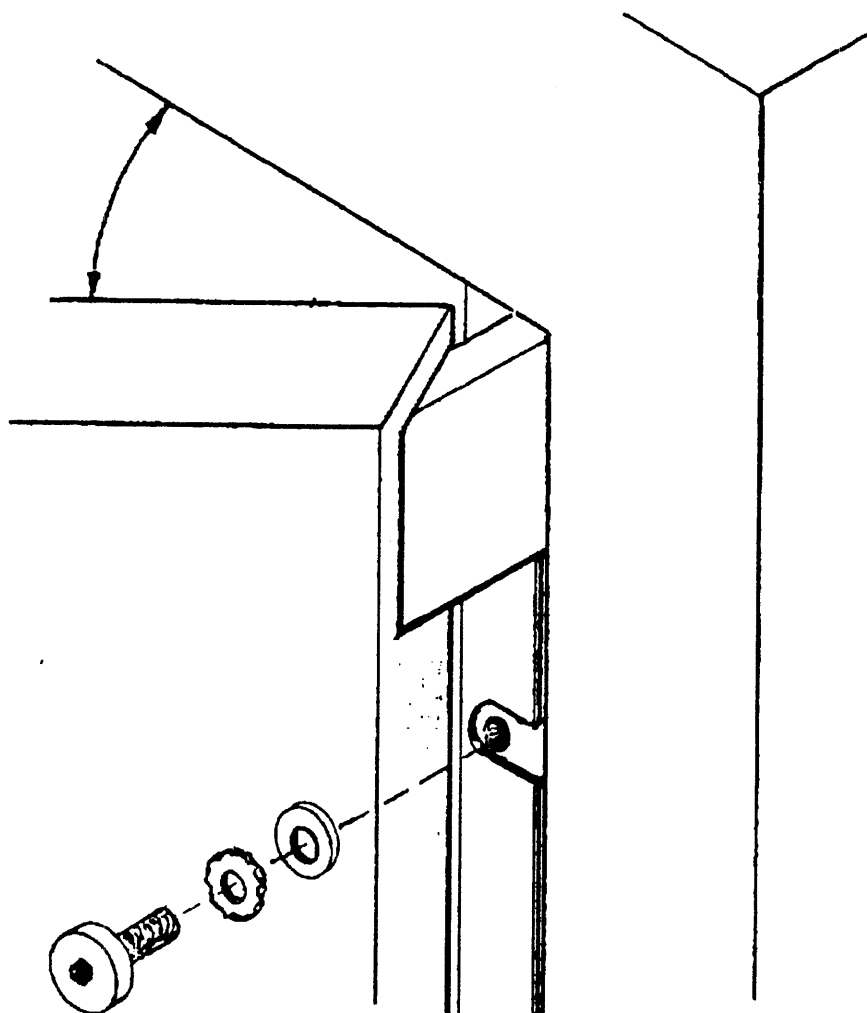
2-7 Option 132 Installation- Right Chassis Mounting
